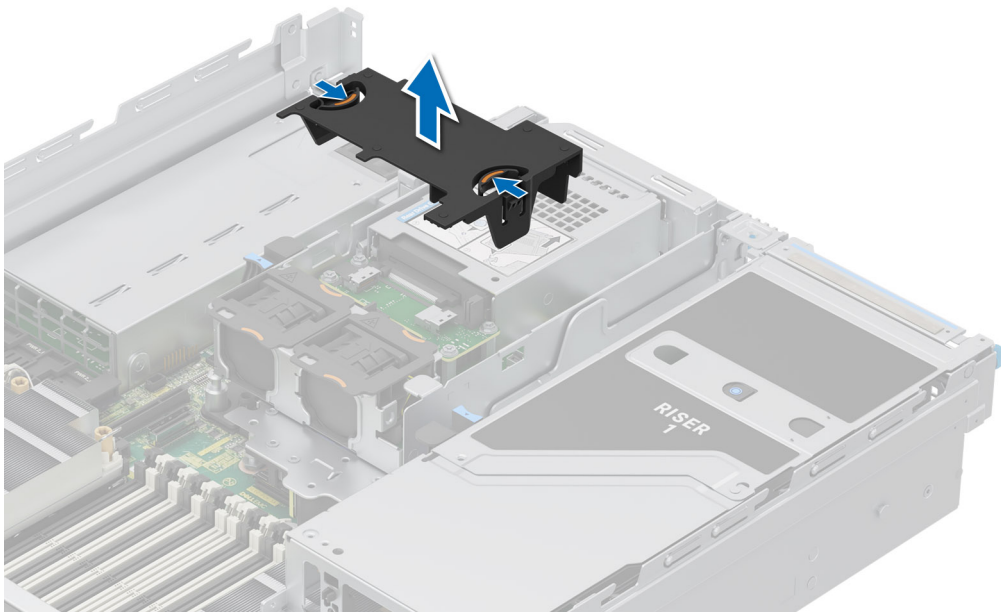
Removing the 2 x 2.5-inch rear drive module air shroud
